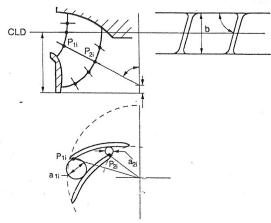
Runner/impeller of radial flow machine. Check of inlet and outlet widths between blades (example of a pump-turbine runner)
